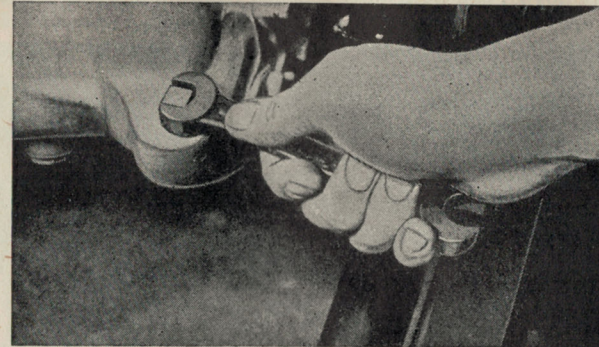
GEARBOX OIL LEVEL AND FILLER PLUG
